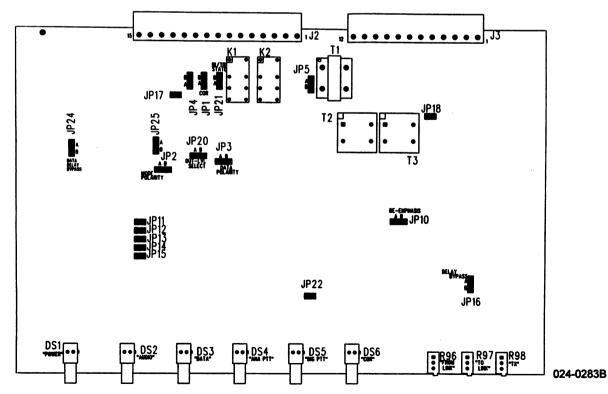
Model 66 PCB Jumper Locations, Revision P and Later
